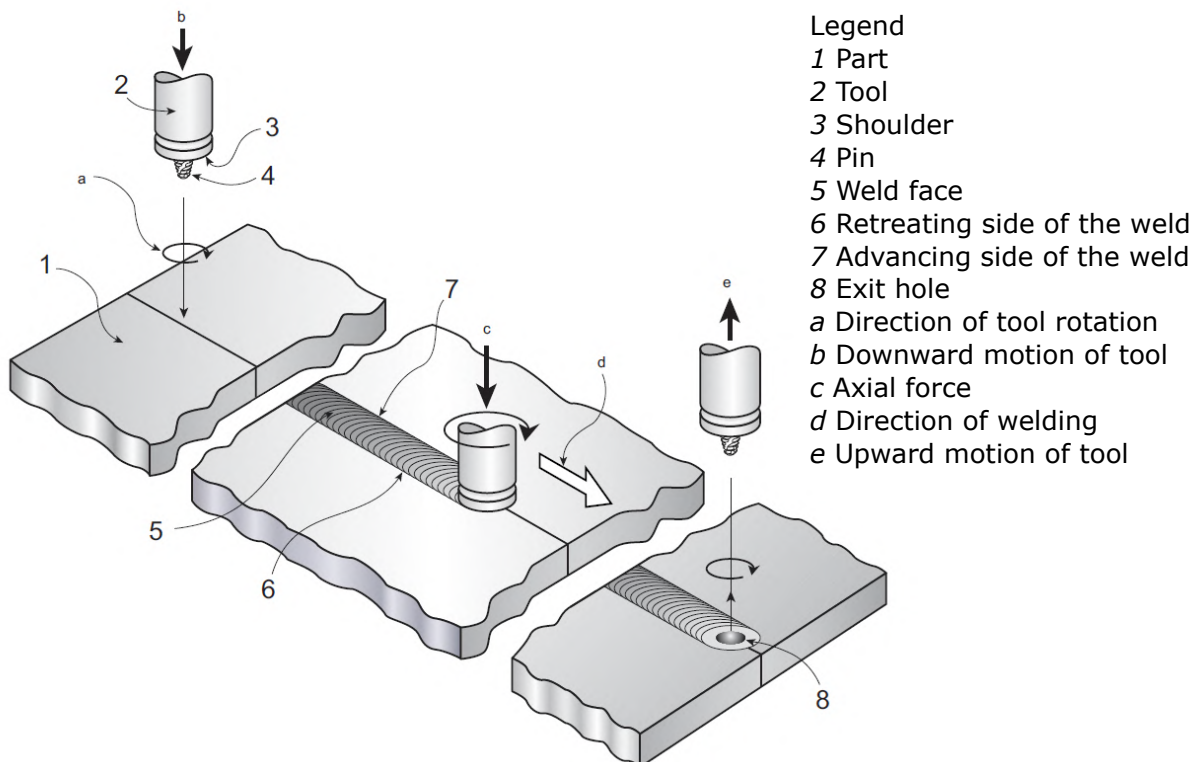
Representation of a FSW weld with the appropriate terminology based on ISO 25239 [8]
